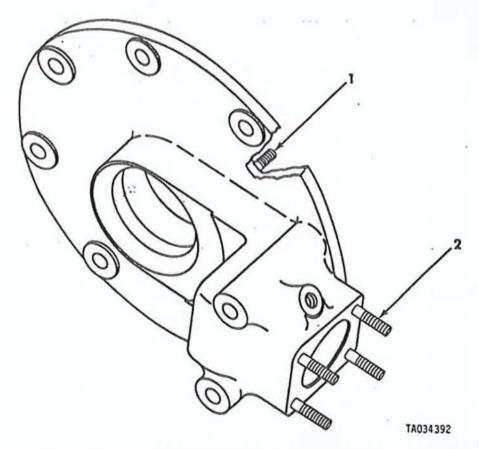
Power take-off drive assembly housing standard stud identification.
